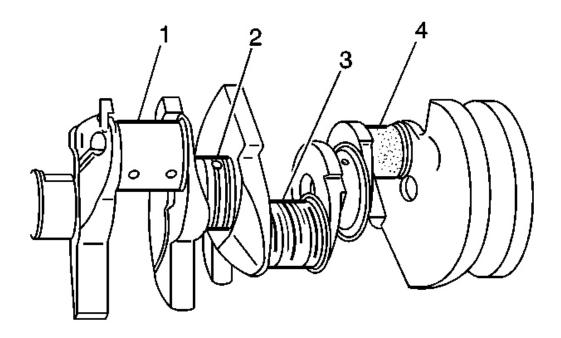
Identifying Different Crankshaft Journal Wear Patterns Courtesy of GENERAL MOTORS CORP.
